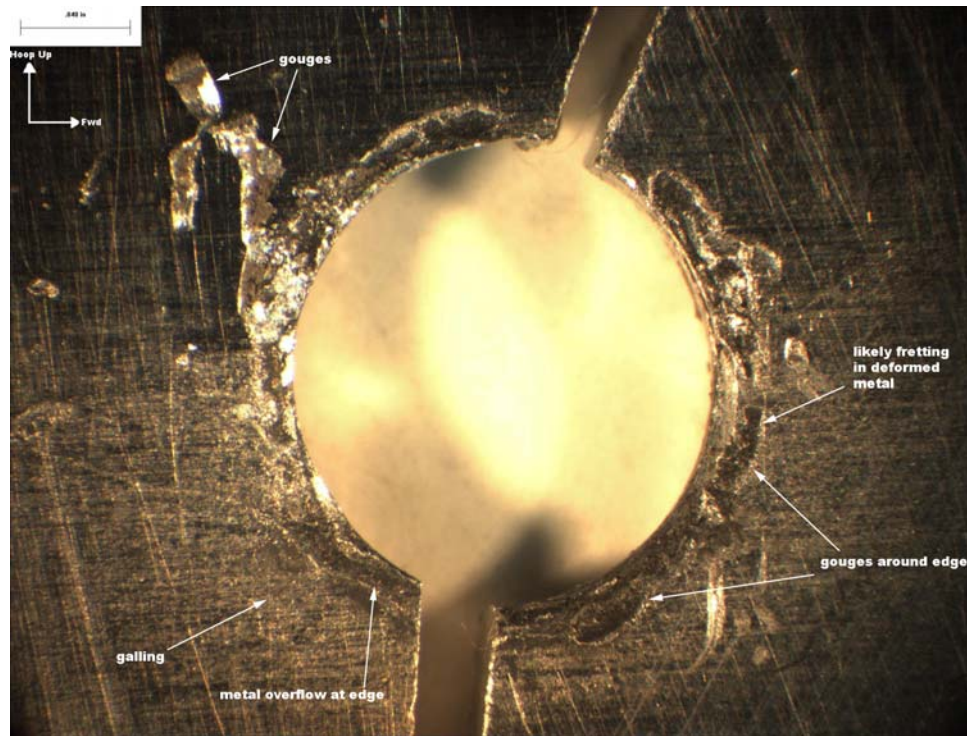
Examples of fretting damage observed for some rivet holes from the teardown inspection (faying surface, right hand side panel joint)
